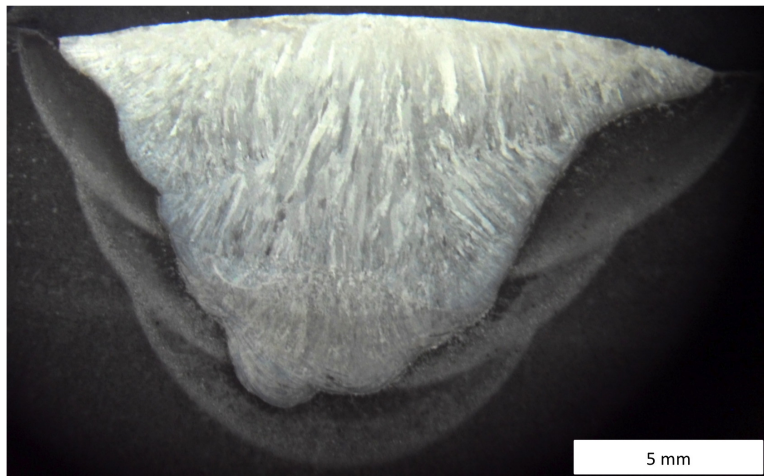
Macrostructure of weld 2 revealed using ferric chloride.
